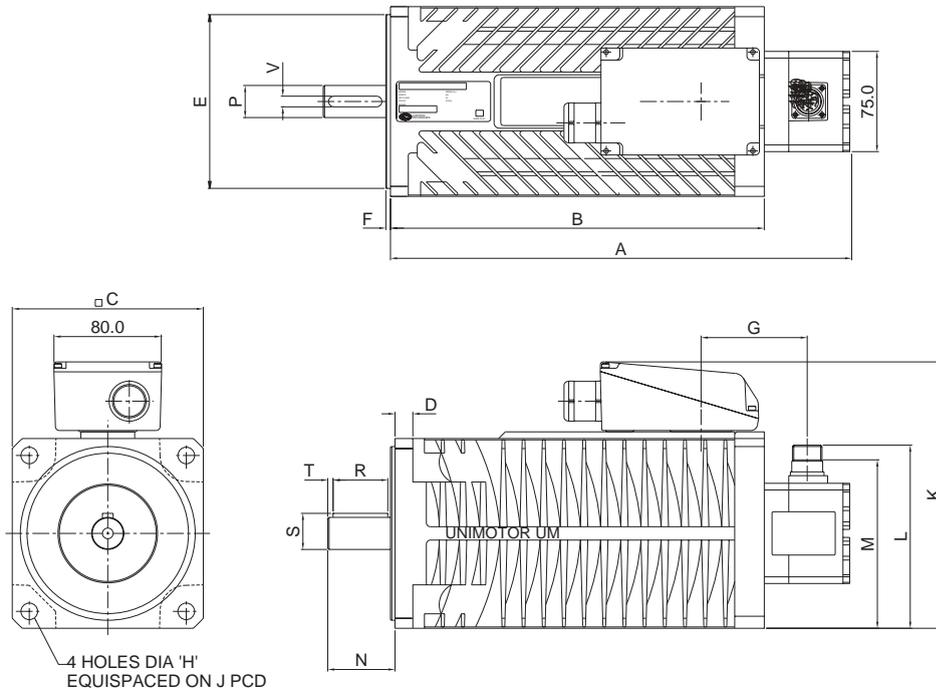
Outline Drawing - Frame Size 190 Hybrid Box
